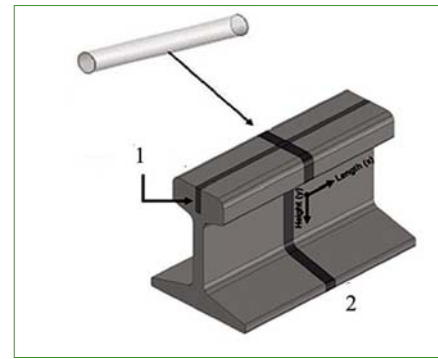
Scheme of shearing of samples for tensile testing: 1 – center of rolling strip; 2 – welded joint
